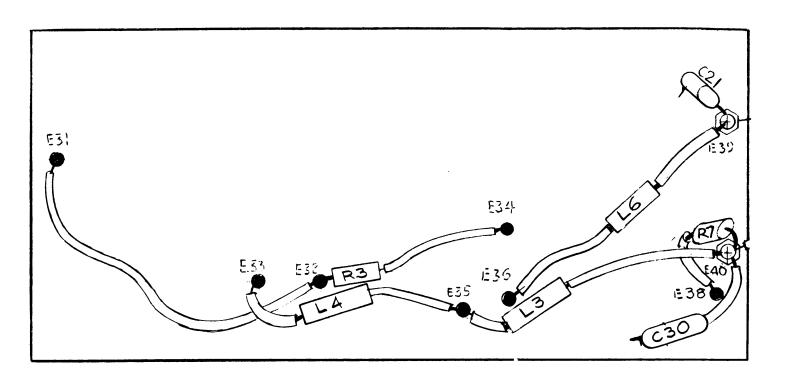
IF Output Mixer Assembly Z305, Location of Components
